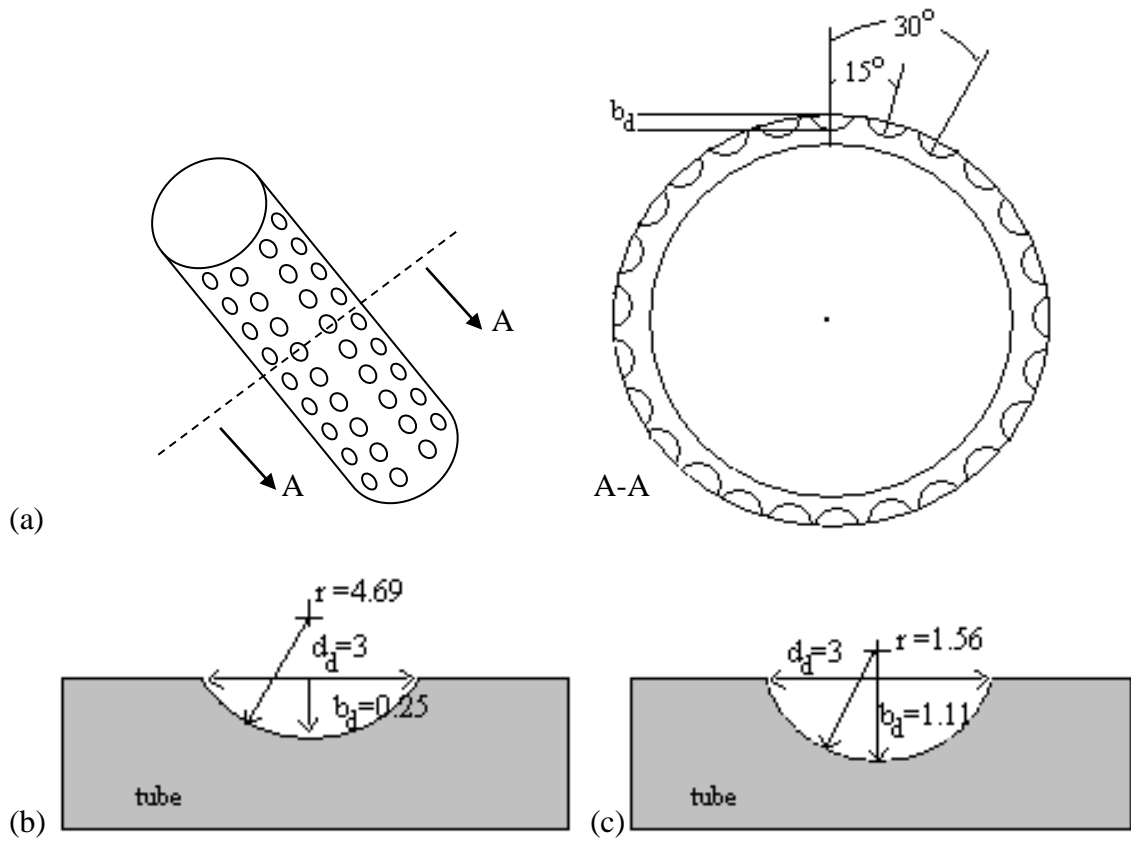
Schematic diagrams showing (a) cross section of a dimpled tube. (b) details of a dimple geometry for shallow dimples. (c) details of a dimple geometry for deep dimples (dimensions are in millimeters).
